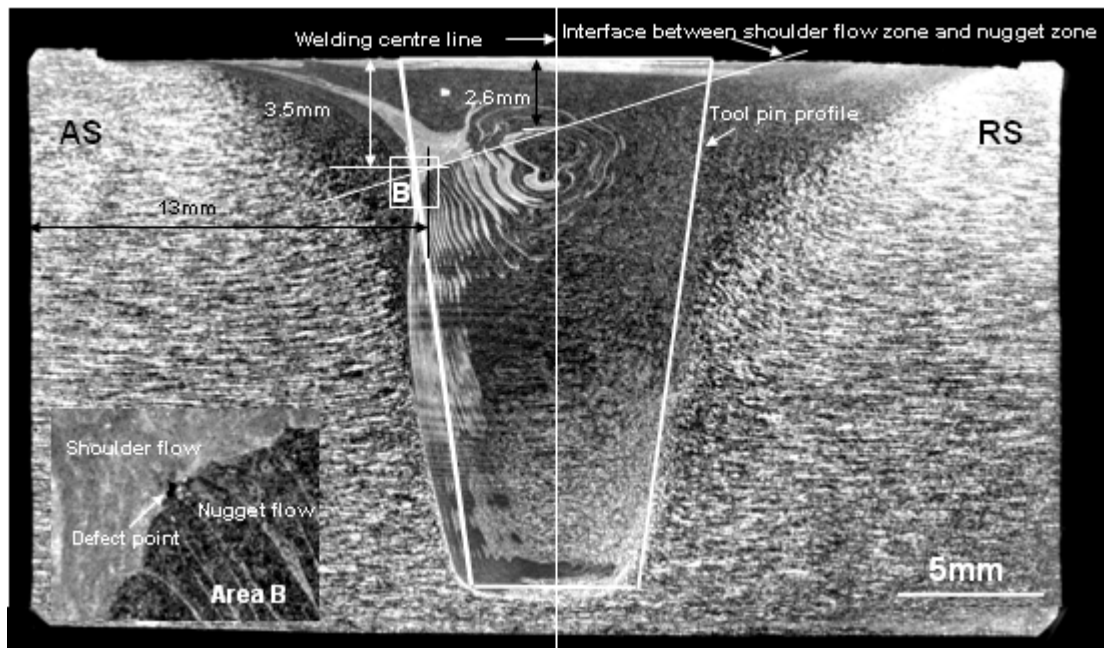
Microstructure of weld 11 longitudinal cross section (sectioning through welding centre line, on X-Z plane), indicating the shoulder flow zone and nugget zone, and the spacing of banded lines ( $\lambda$ ), using scroll shoulder and tapered thread pin tool FSW at  $\omega=250\text{rpm}$ ,  $H=0.6\text{mm}$  and  $V=40\text{mm/min}$
